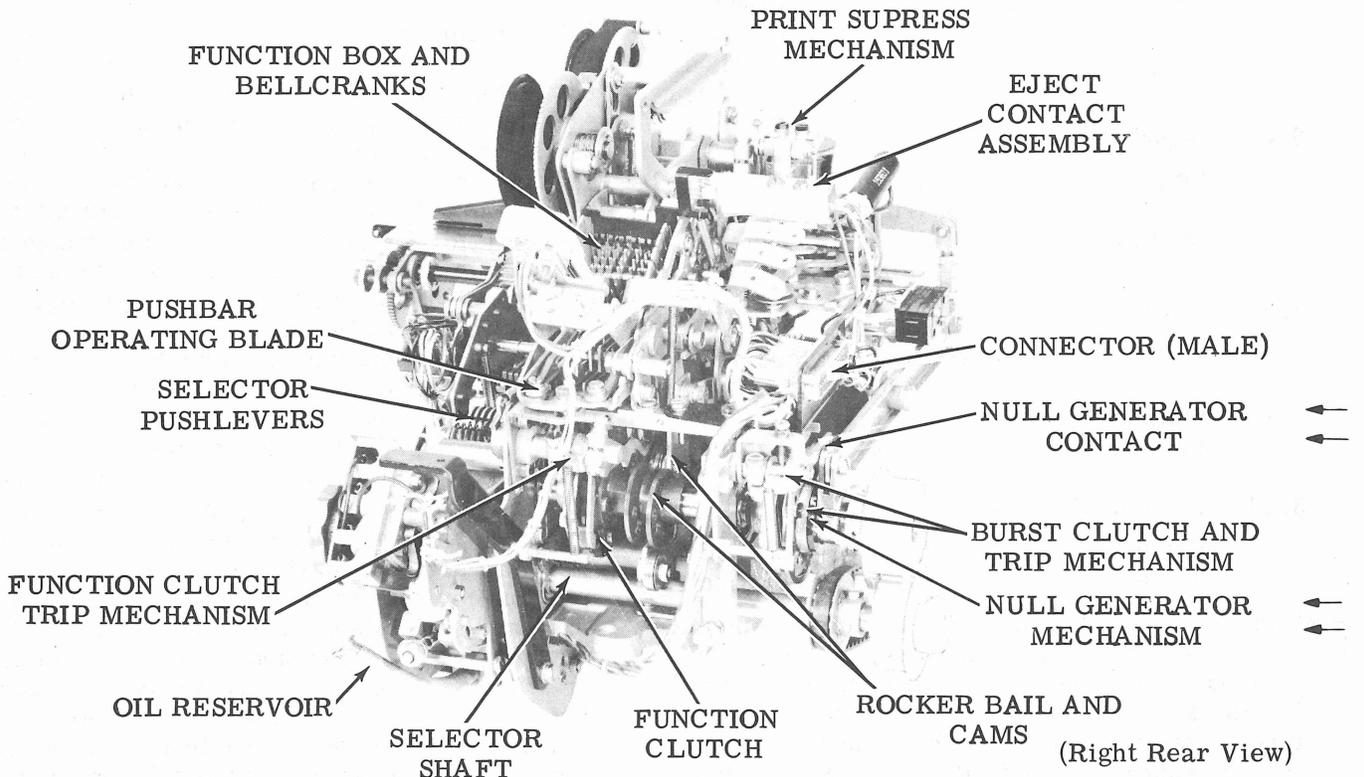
35 Edge Punched Card Typing Reperforator (Without Top Plates)
